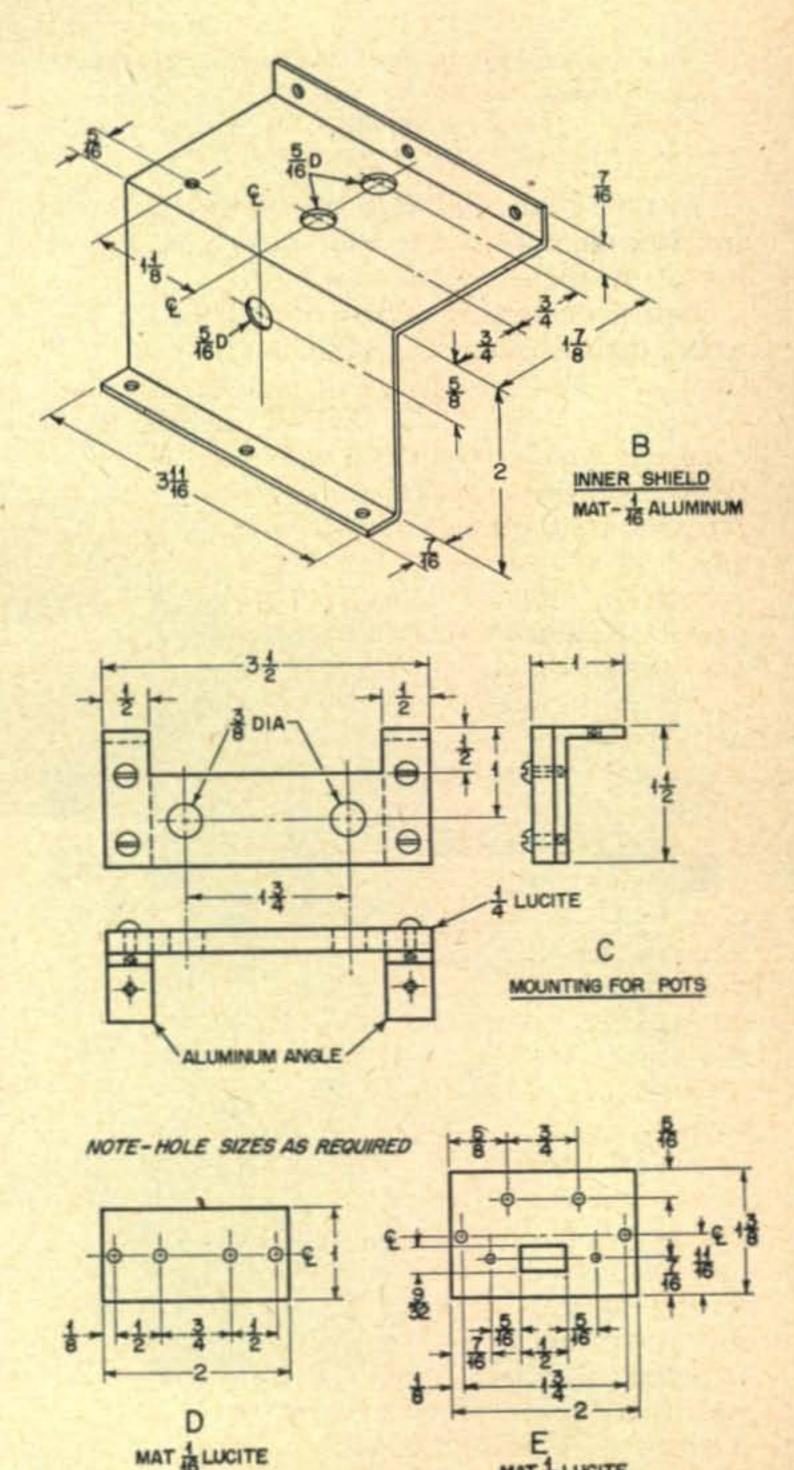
Minibox, shield and mounting bracket layouts and drilling dimensions.
